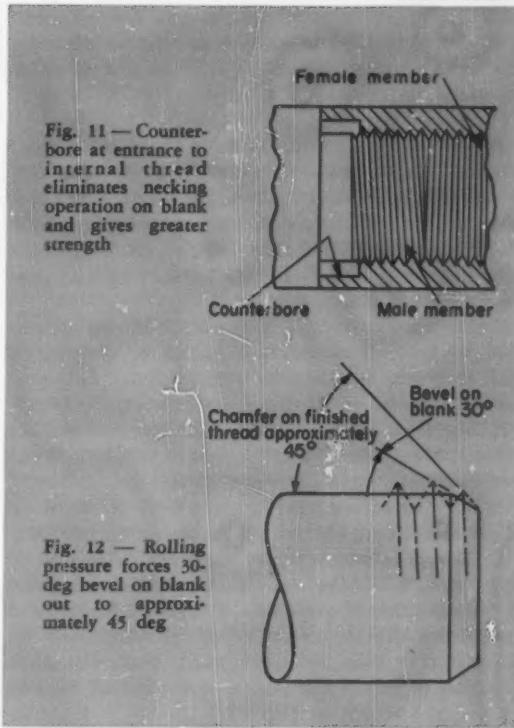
Counterbore at entrance to internal thread eliminates necking operation on blank and gives greater strength
